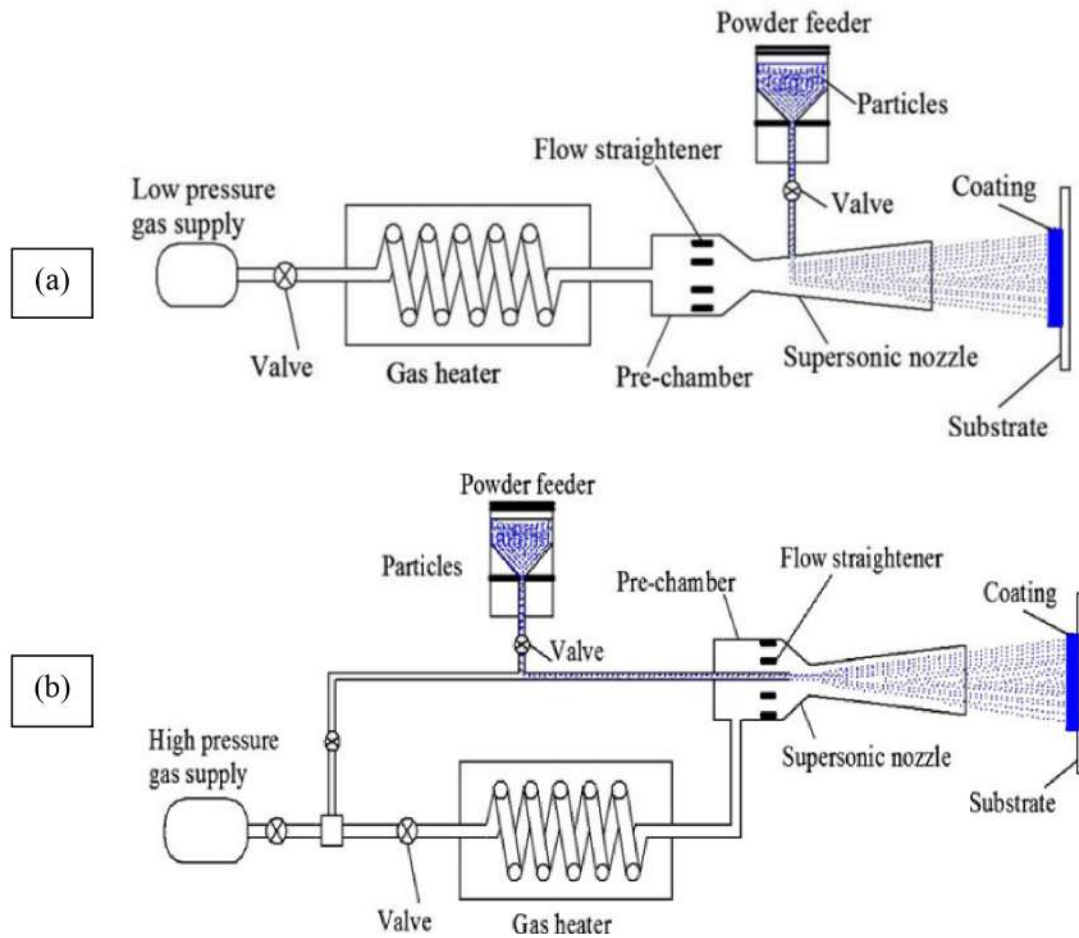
Cold Spray Apparatus (a) Low Pressure Cold Spray Setup (Maev and Leshchynsky, 2008), (b) High Pressure Cold Spray Setup (Grujicic et al., 2004)
